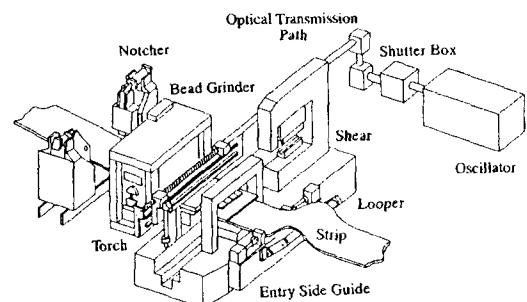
Laser welding of coil connection in rolling mills [7]
